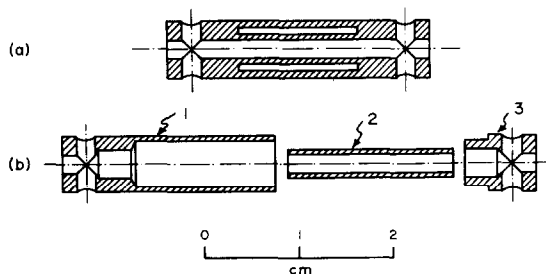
Circular cavity furnace; (A) assembled, (B) dismantled. 1. Casing. 2. Inner tube. 3. Stopper.
